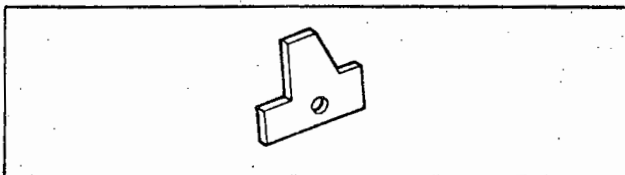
T25939 Enrichment Valve Screw Adjusting Assembly Gage
